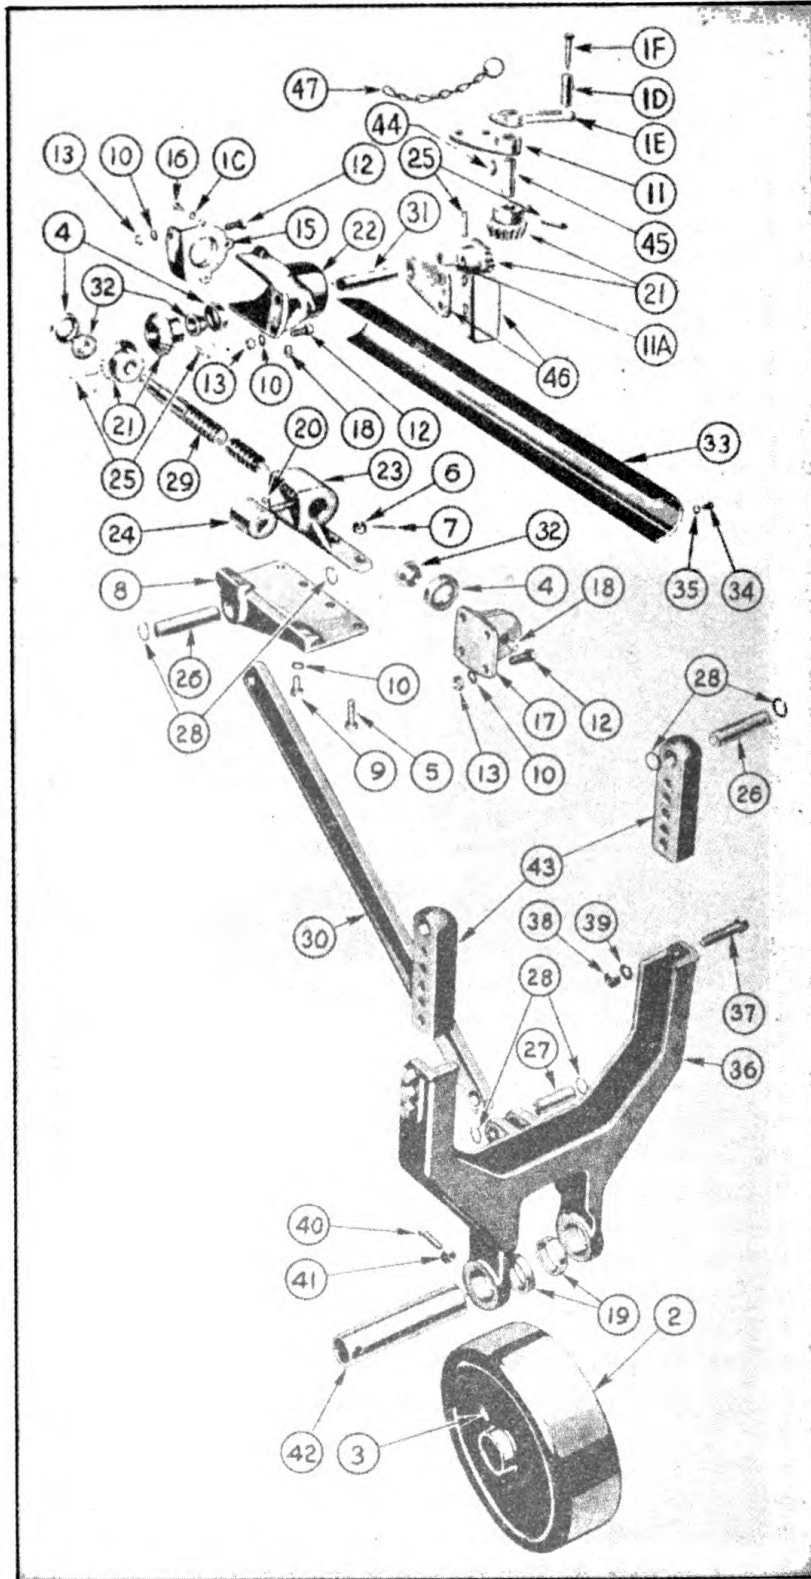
CONVERTER GEAR SUPPORT—EXPLODED
